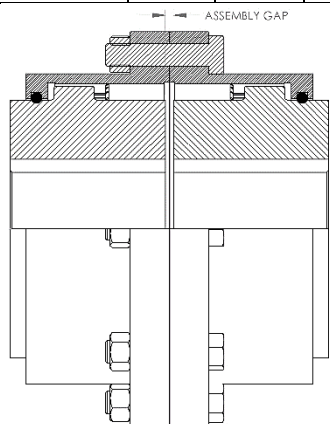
DOUBLE FLEX ASSEMBLY GAP
